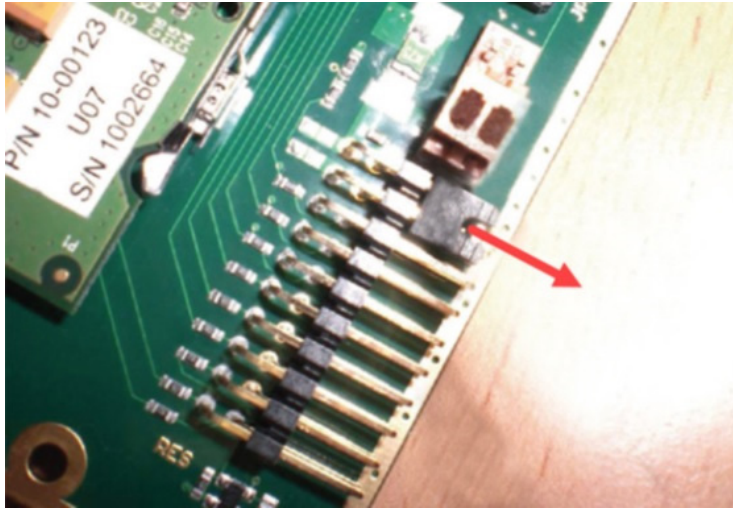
Removing Jumper from Between Pin 1 and Pin 3 on a USB 2.0 Only Option cad
